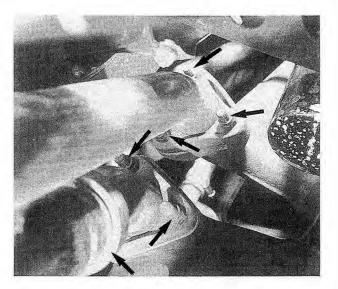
Front pipe to exhaust manifold mounting nuts (arrows).
